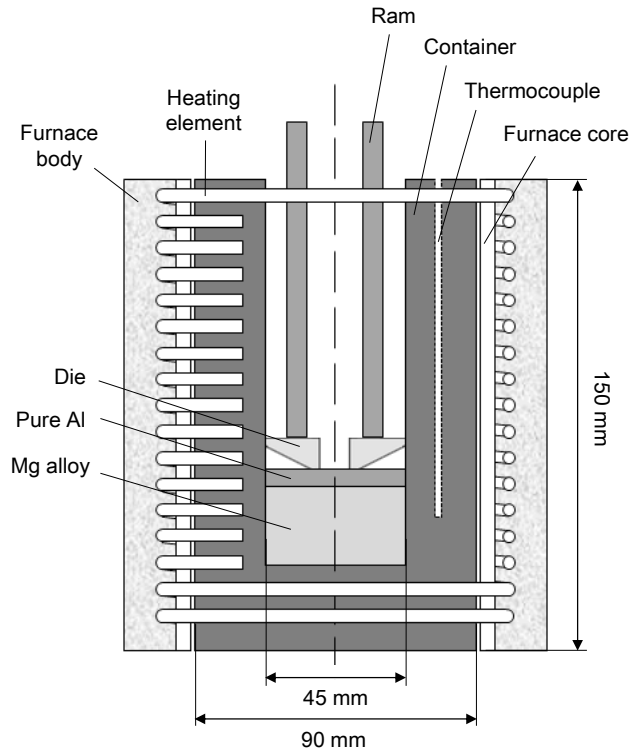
Schematic drawing of equipment and materials for the extrusion
